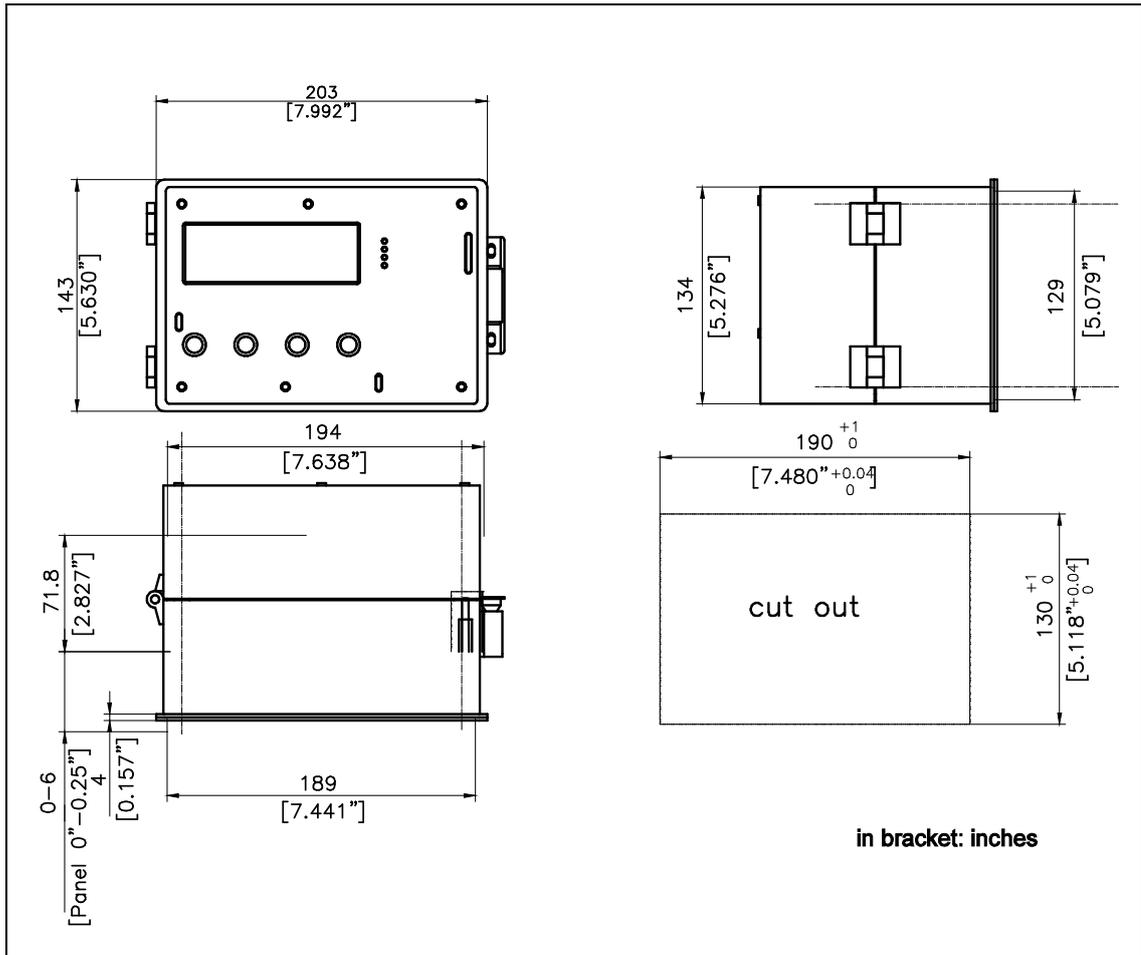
dimensions of the electronic housing (panel mounting BMGZxxA.S)
